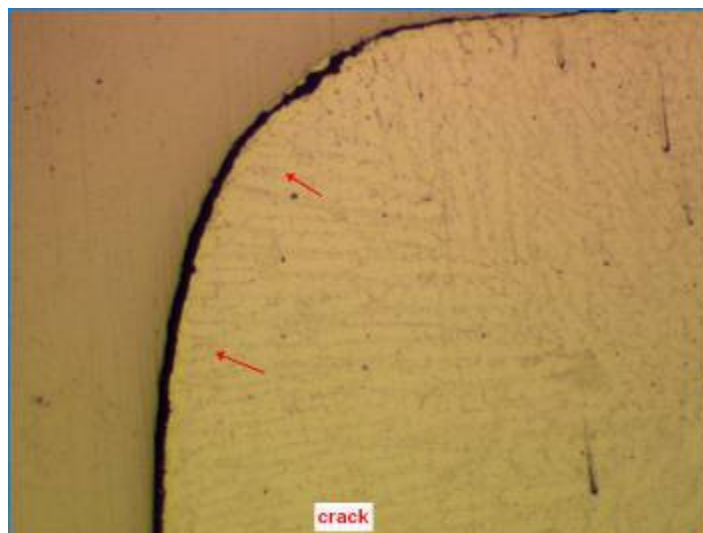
cross section, SN62, U61, left lead solder crack, 400x b
